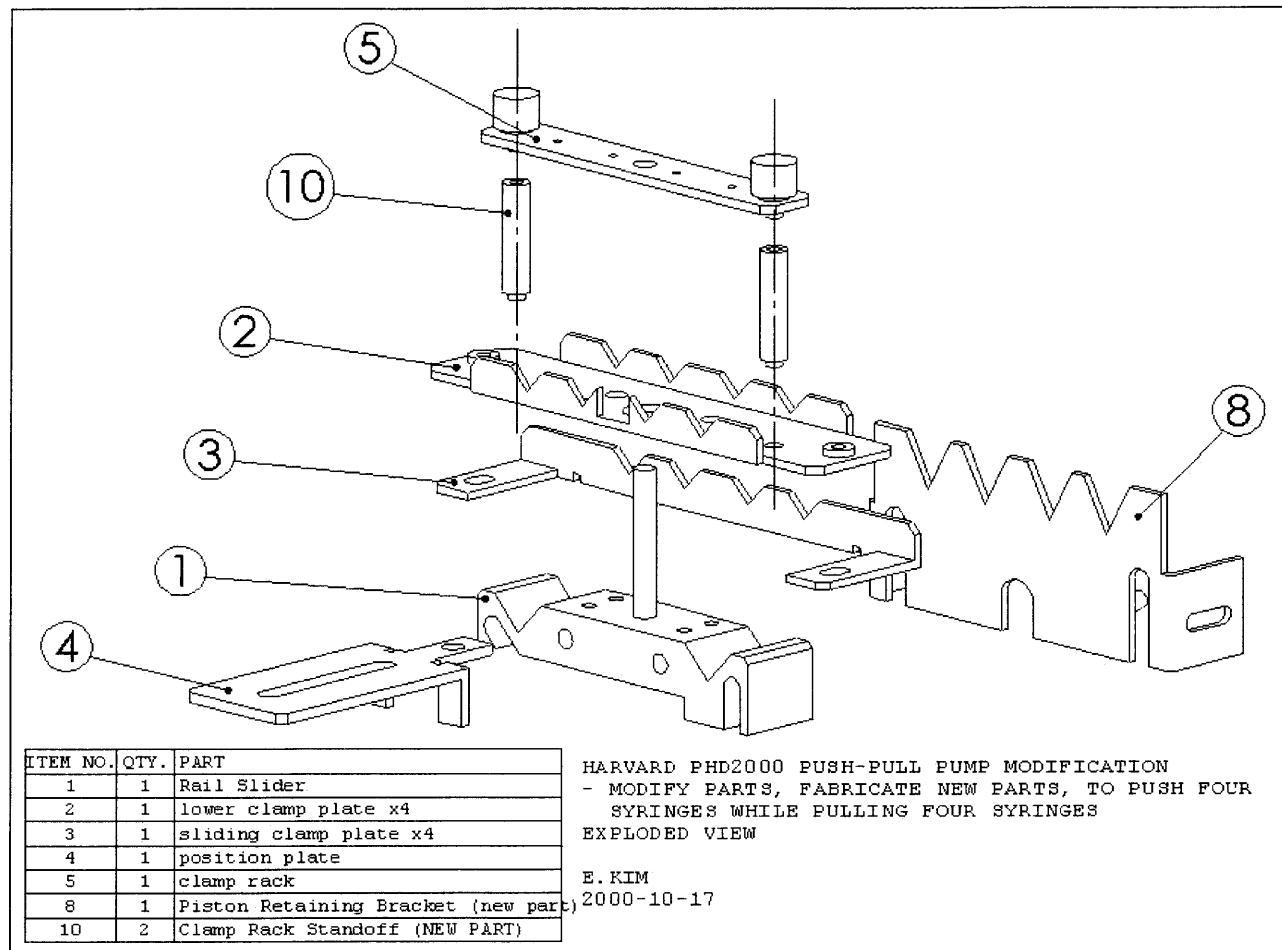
Exploded-assembly drawing of the Harvard PHD2000 Push-Pull Pump Modifications
